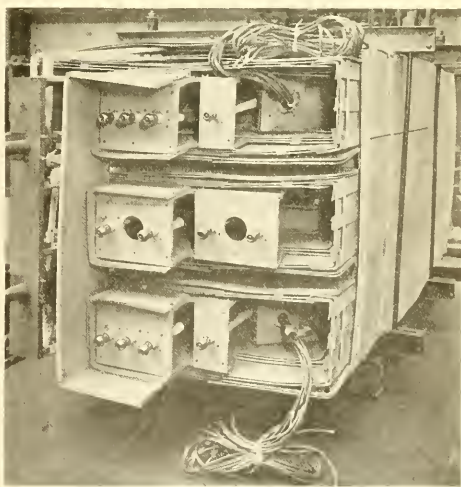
ASSEMBLED COILS AND INSULATION IN POSITION
